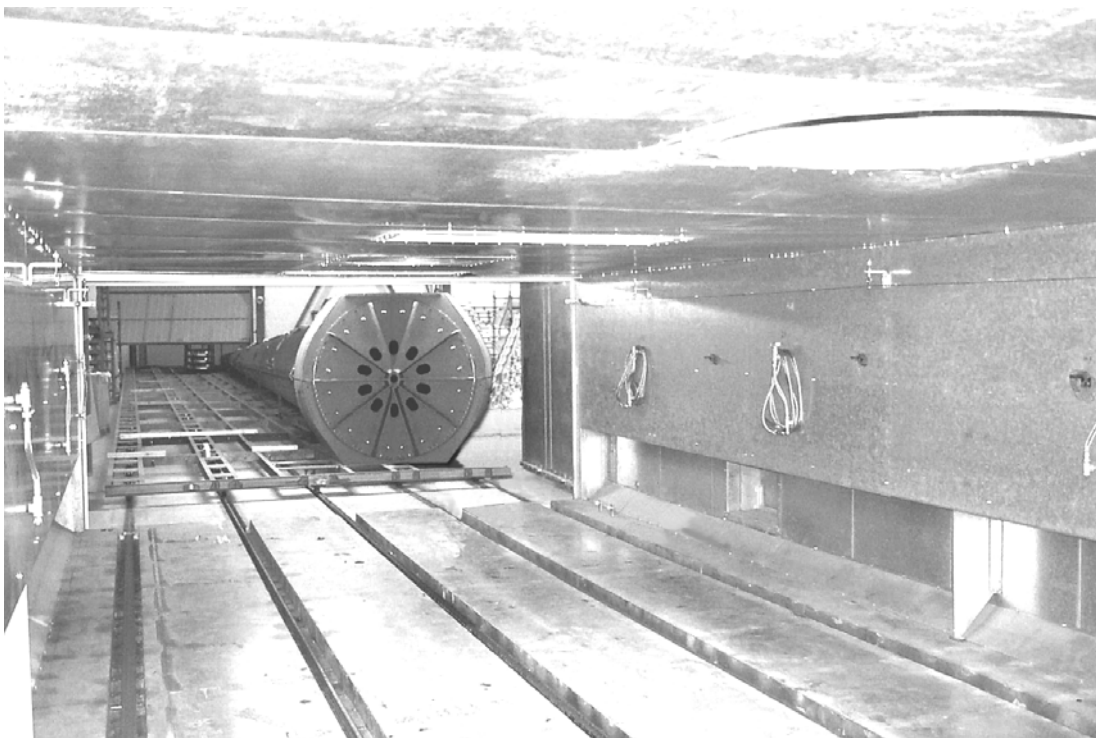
Industrial furnace and piece to be manufactured inside. (Siflexa, M.Torres-Spain)
